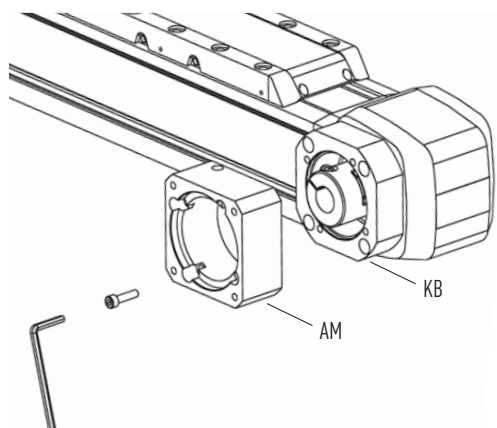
Mounting the motor adapter plate AM (HM-B)
